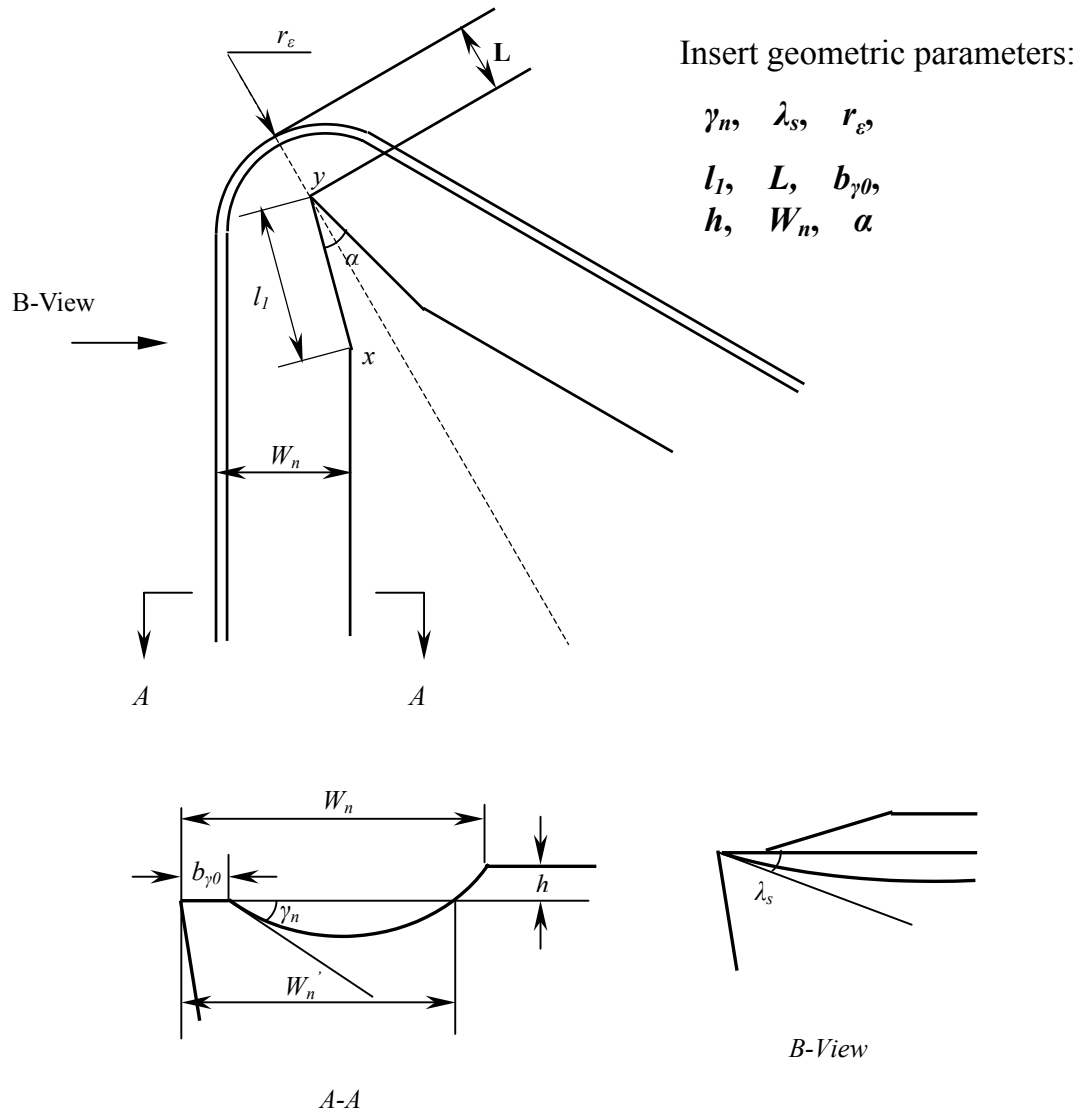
The Three-Dimensional Grooved Insert Geometric Features
